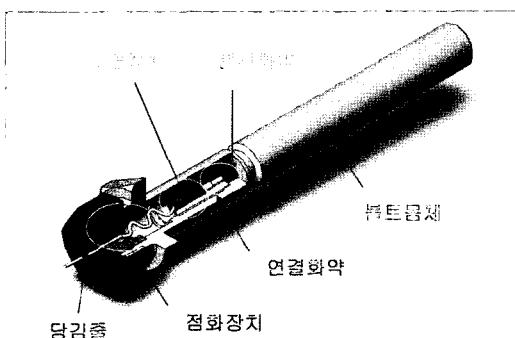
Shape of Non-electric and Delay Type Explosive Bolt
